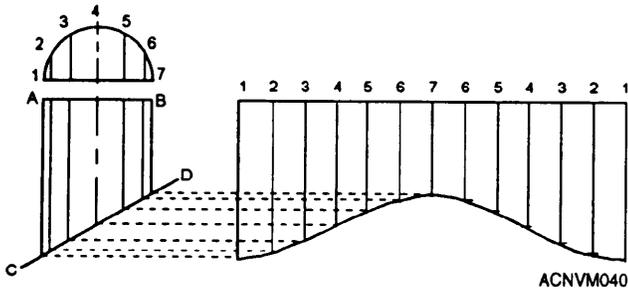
Transferring from elevation to stretchout to making the pattern.
